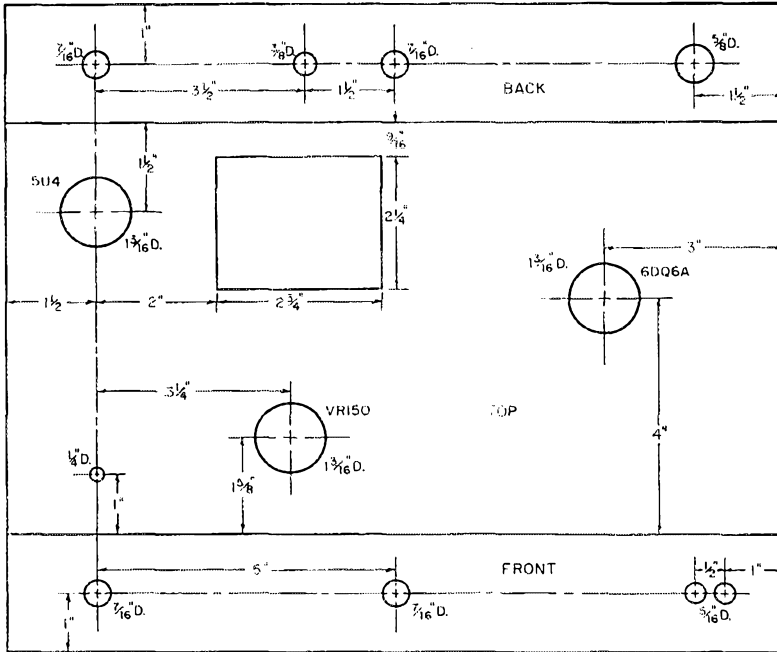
This drawing gives the important dimensions for the holes on the top, front, and back of the 2 x 7 x 13-inch aluminum chassis
